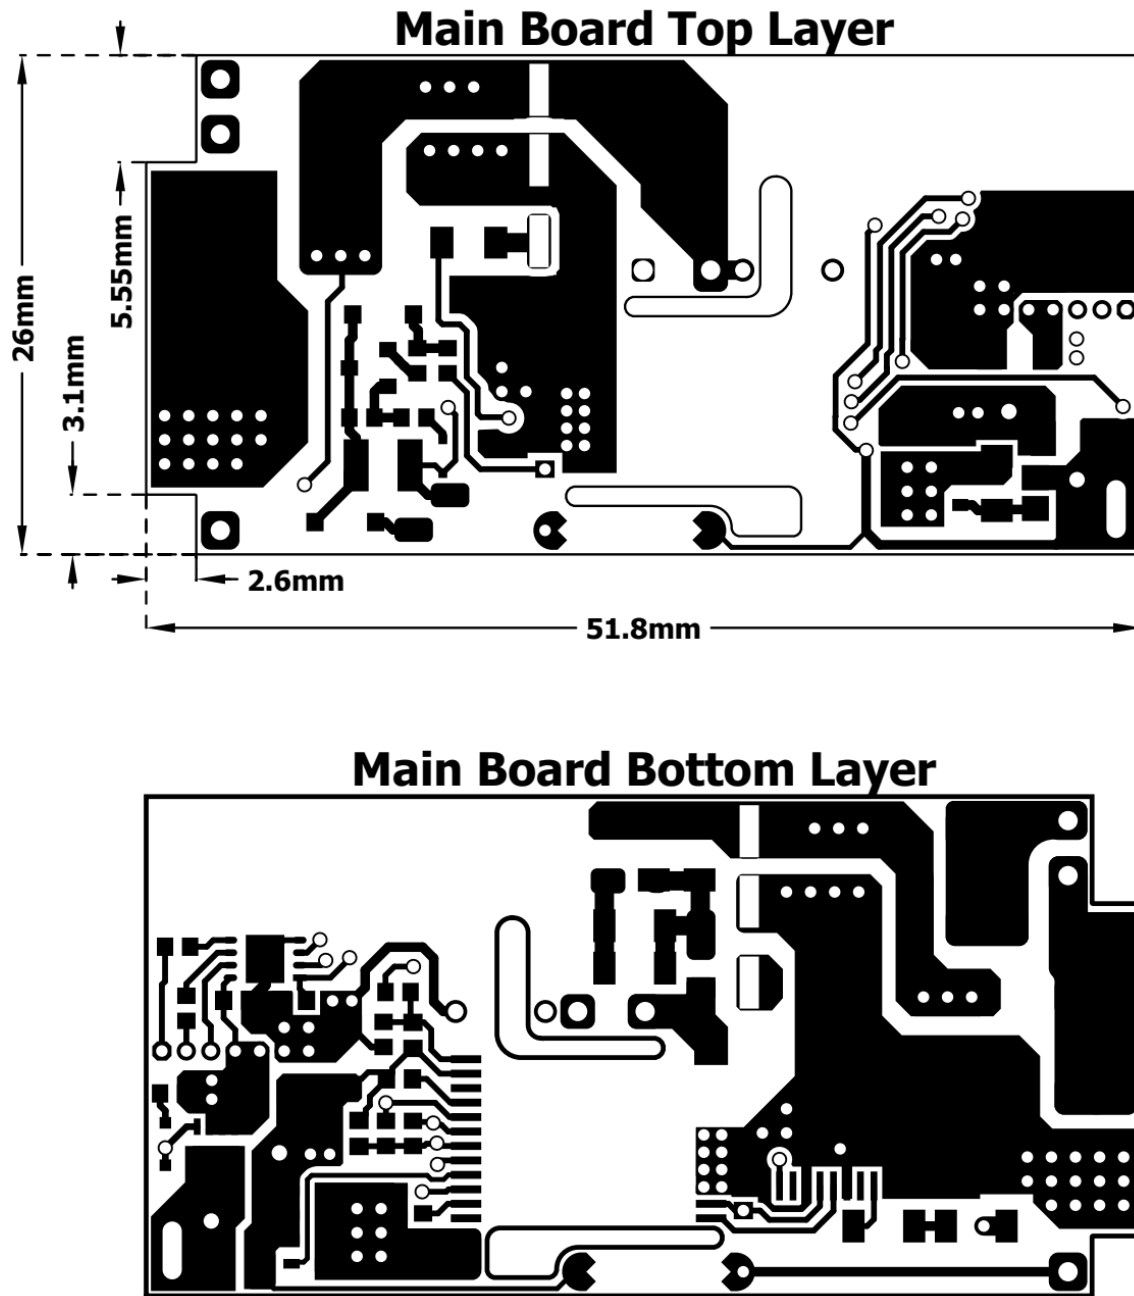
DER-822 Rev B Main Board Top and Bottom Layers.
